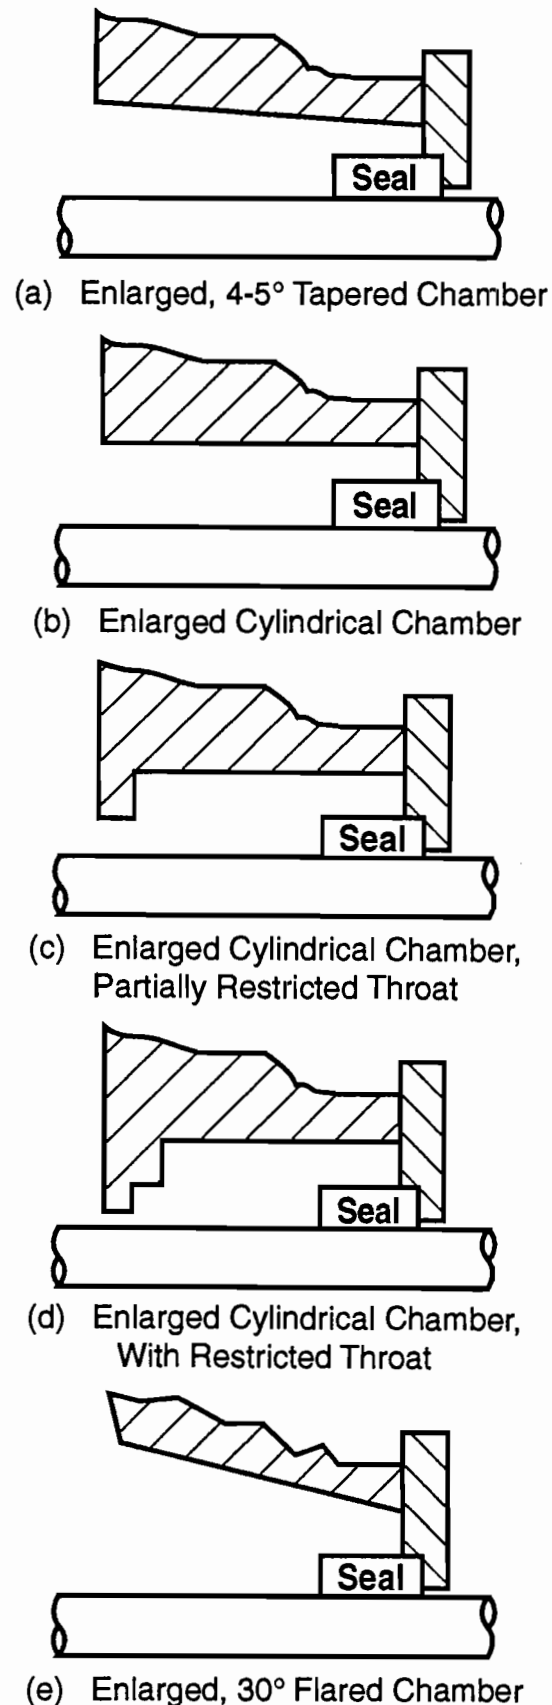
Mechanical Seal Installed in Optional Enlarged Seal Chambers.
